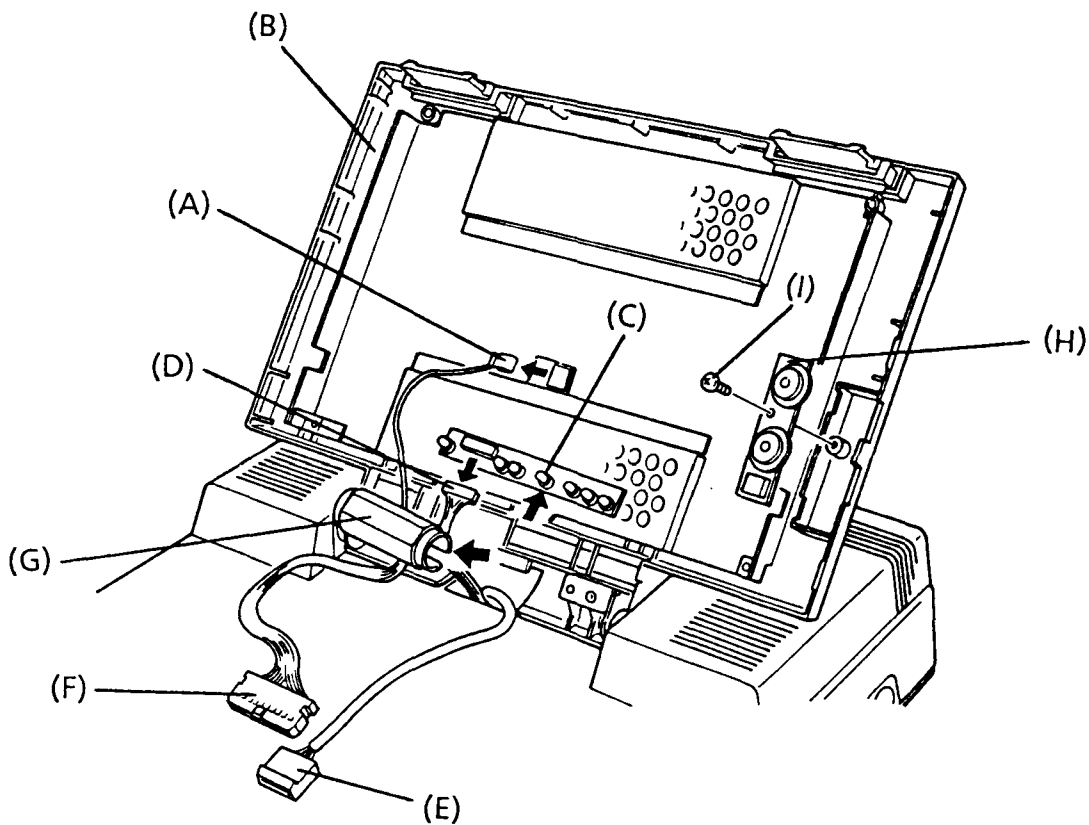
Removing the Indicator PCB and the Cable Guide
